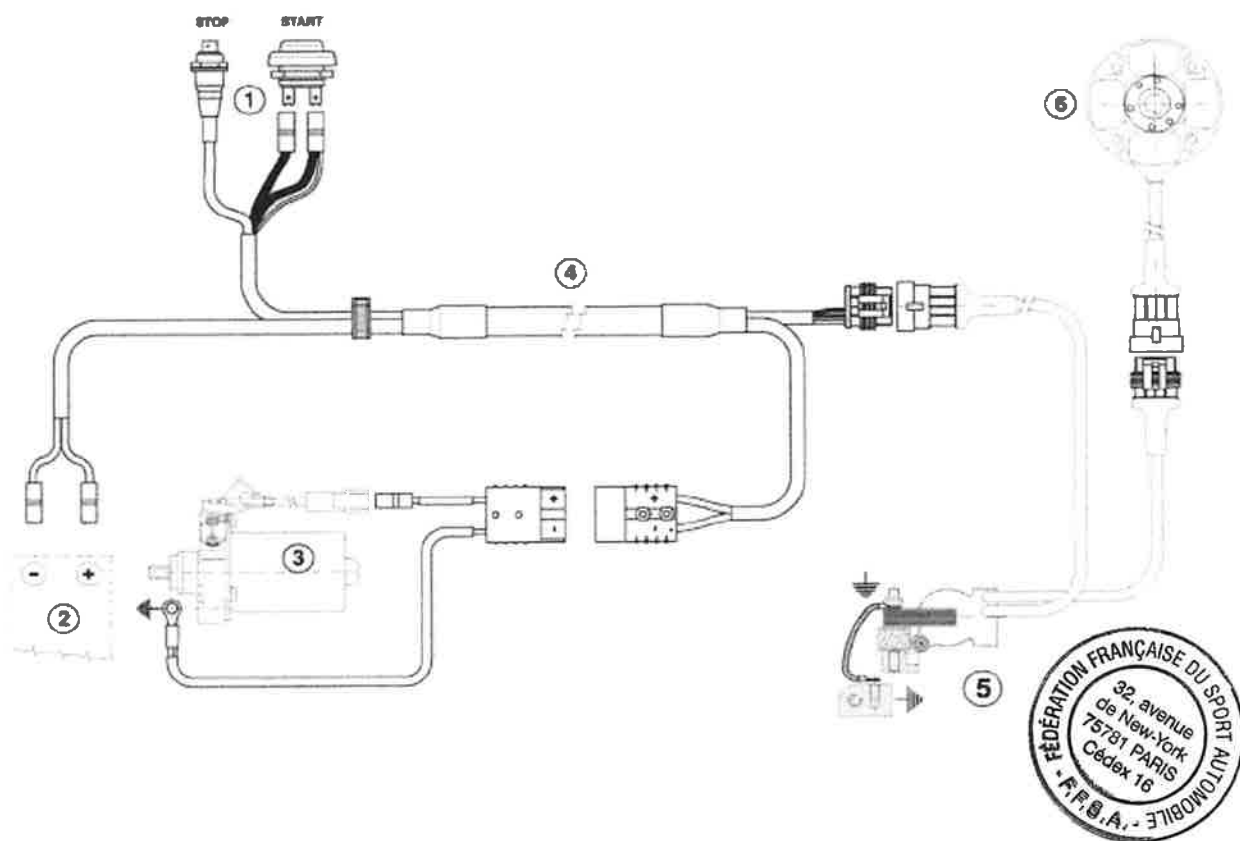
PHOTO COMPLETE ALTERNATIVE WIRING LOOM
